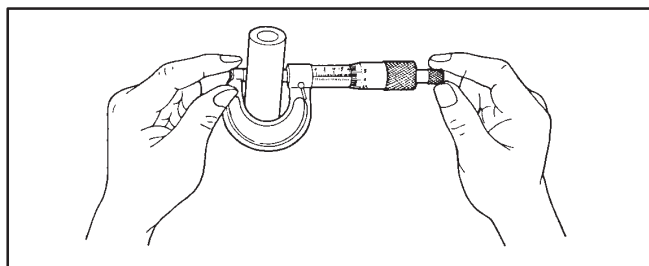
MEASURING PISTON PIN DIAMETER
